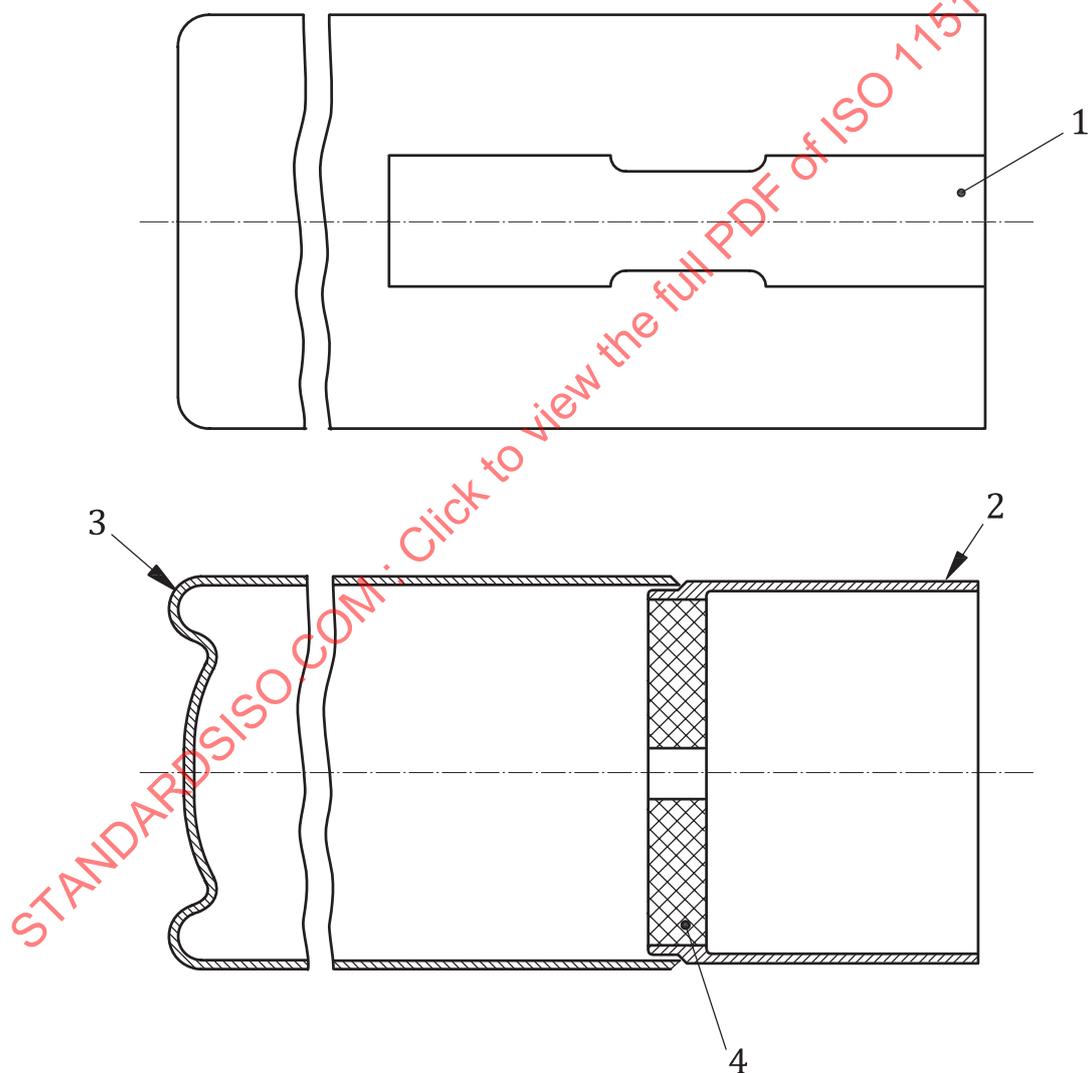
Test specimen for tensile test perpendicular to the weld
